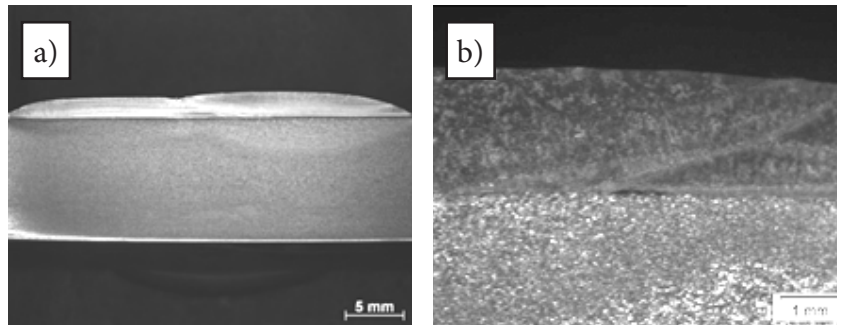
Macrostructure of the overlay weld made using laser-powder surfacing (process 152) and cobalt powder [2]; alloy group Co1-Co3: a) main view, b) incomplete fusion (401 according to PN-EN ISO 6520-1)
